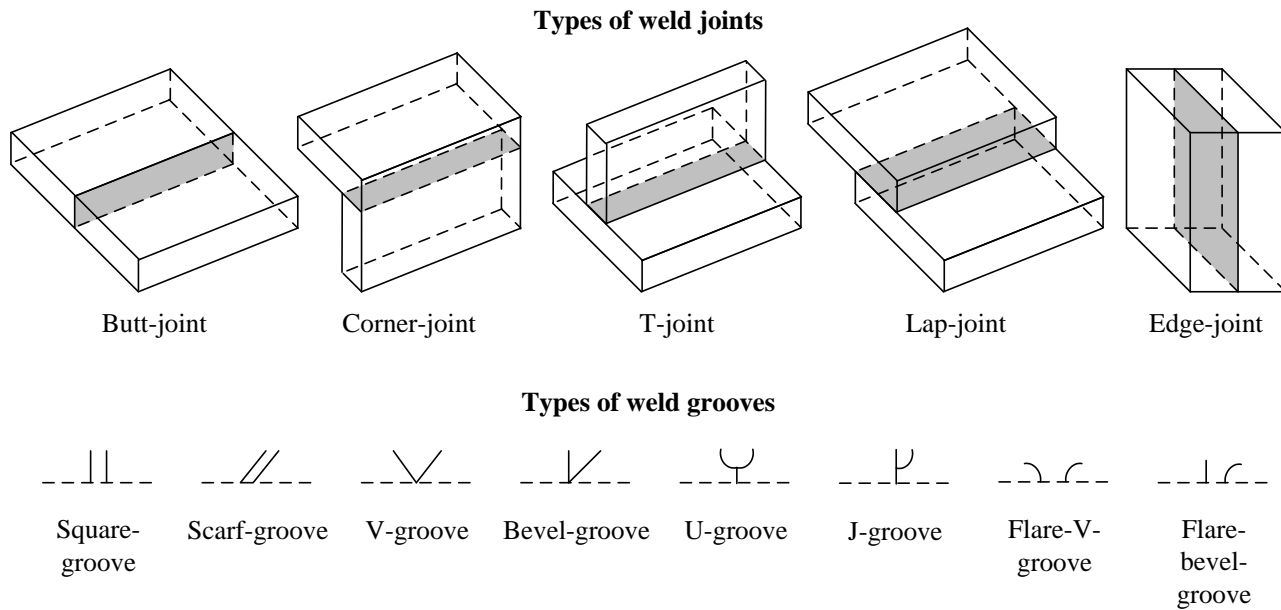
Overview of types of weld joints and weld grooves from [Welding Encyclopedia, 1997].
